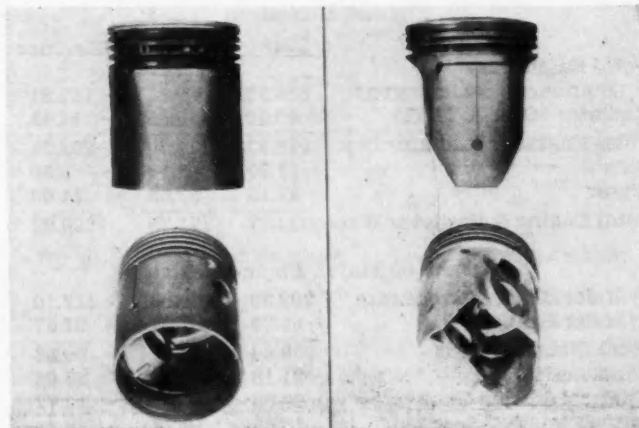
The slipper piston developed for the new Cadillac engine, at right, is an important factor in design compactness. At left is the full-skirt type used in earlier engines
